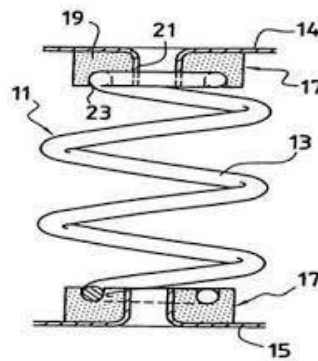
Coil Spring with Compressible Bushings [7].
